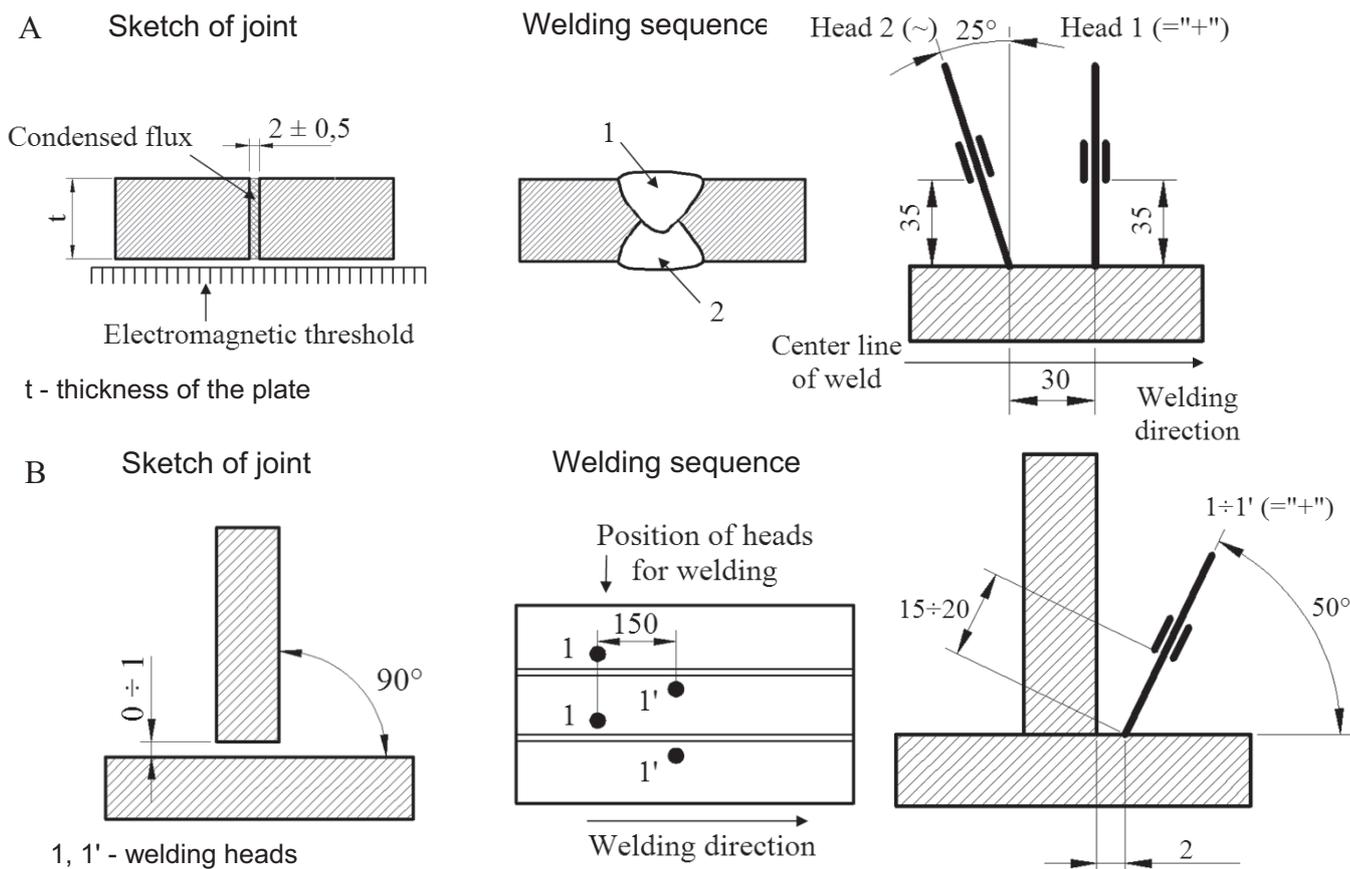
Details of preparation of elements to welding with the use of SAW-tandem technology:
